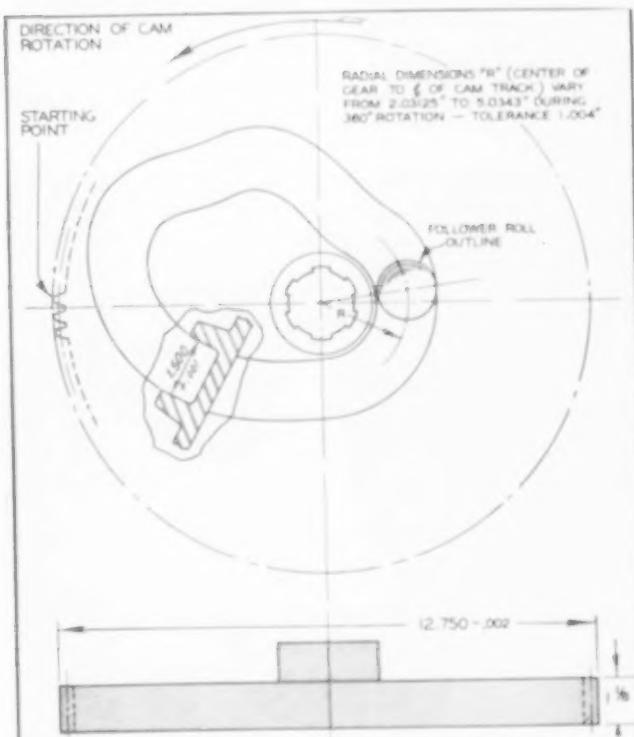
Outline of chain cam and gear, showing the cam track. This chain cam gear, which is a part for one of the gun mounts used by the Navy, actuates the tray and ramming mechanism.
